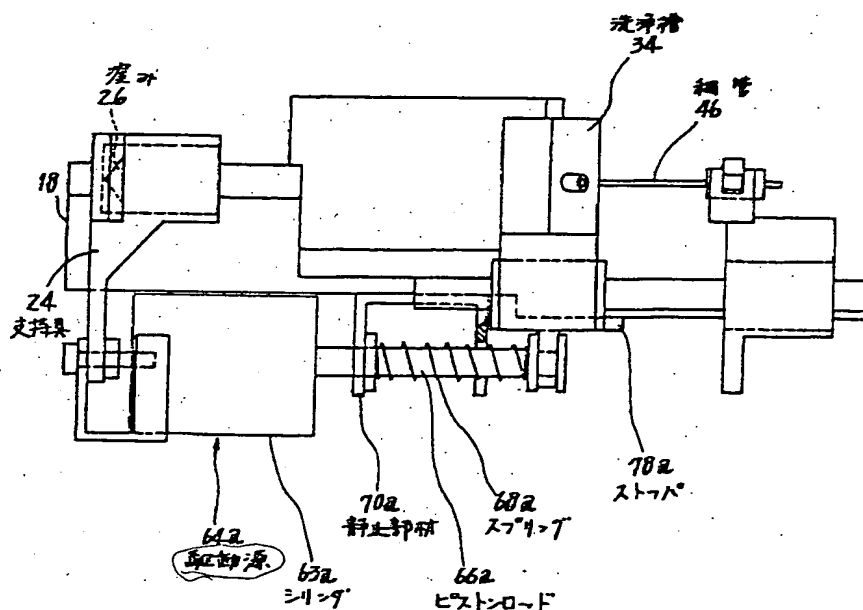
is a schematic diagram of a mechanical assembly in a cross-sectional view. The assembly includes a housing (63a), a piston rod (66a), a piston (68a), a spring (70a), and a stop (78a). The piston rod is connected to the piston and passes through the housing. The spring is positioned between the piston and the stop. The stop is located at the right end of the piston rod. The housing is shown with a break line on the left side.
